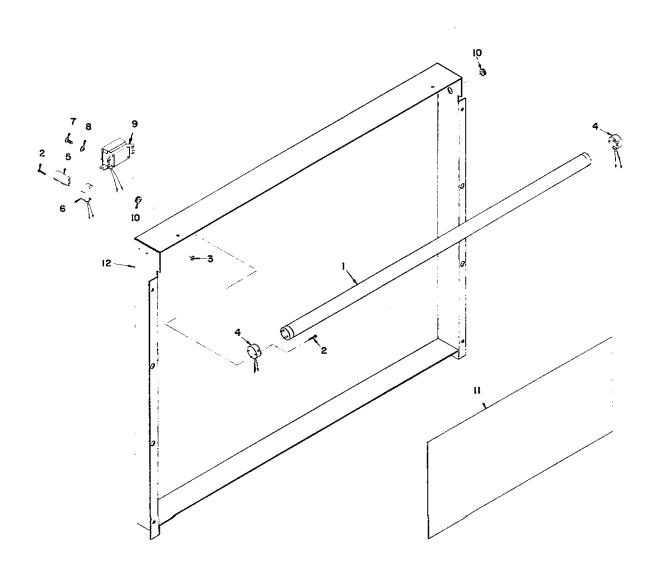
ROWE AWARD SHADOW BOX LIGHT ASSEMBLY
